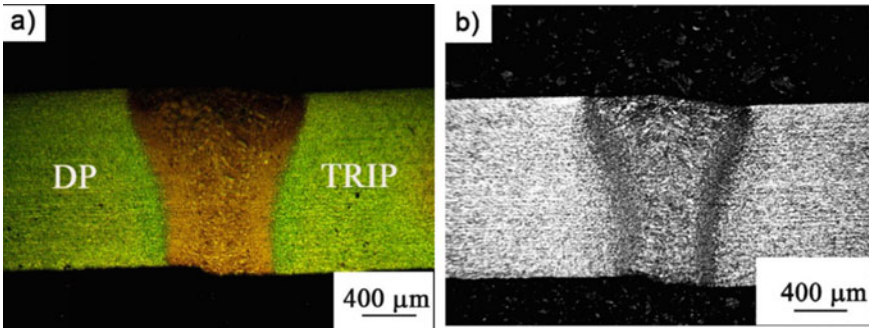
Macroscopic view of a DP-TRIP joint and b TRIP-TRIP joint
